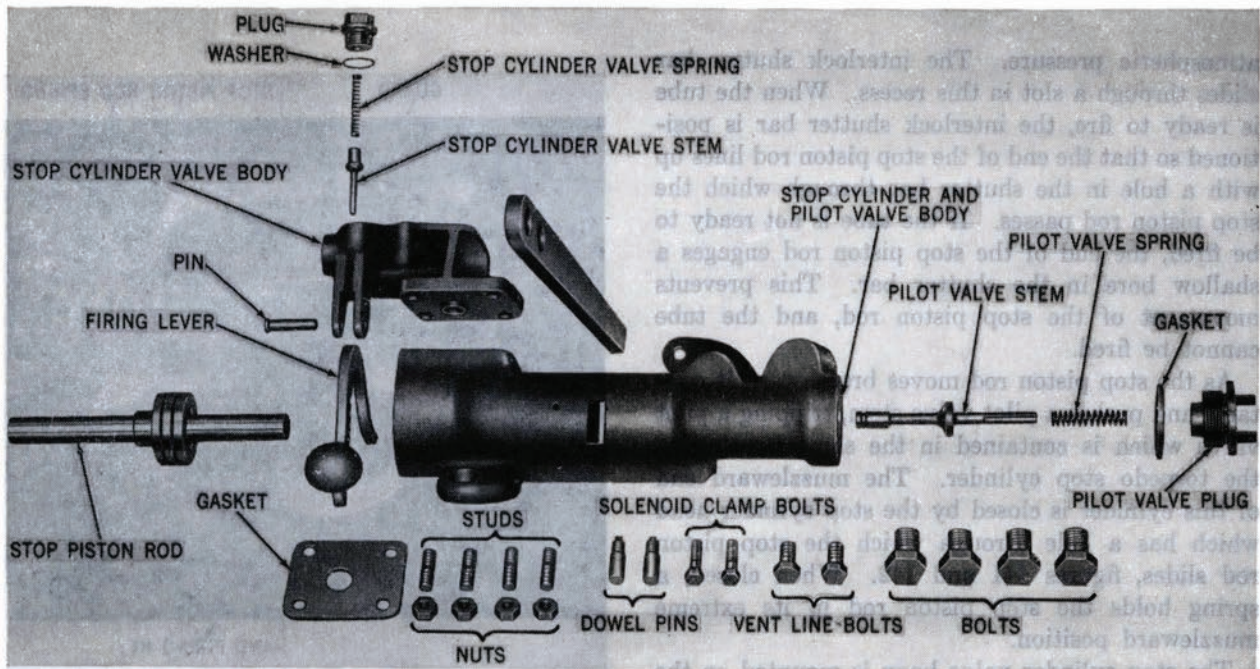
Breech End of Torpedo Stop Cylinder, Pilot Valve, and Stop Cylinder Pilot Valve—Disassembled.
